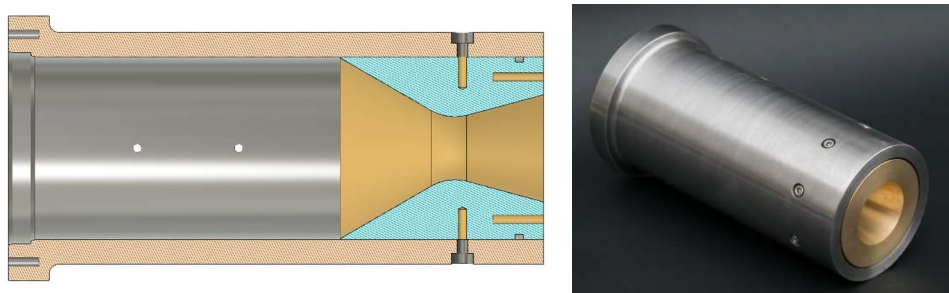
Battleship engine CAD cross-section (left) and after manufacturing (right)
